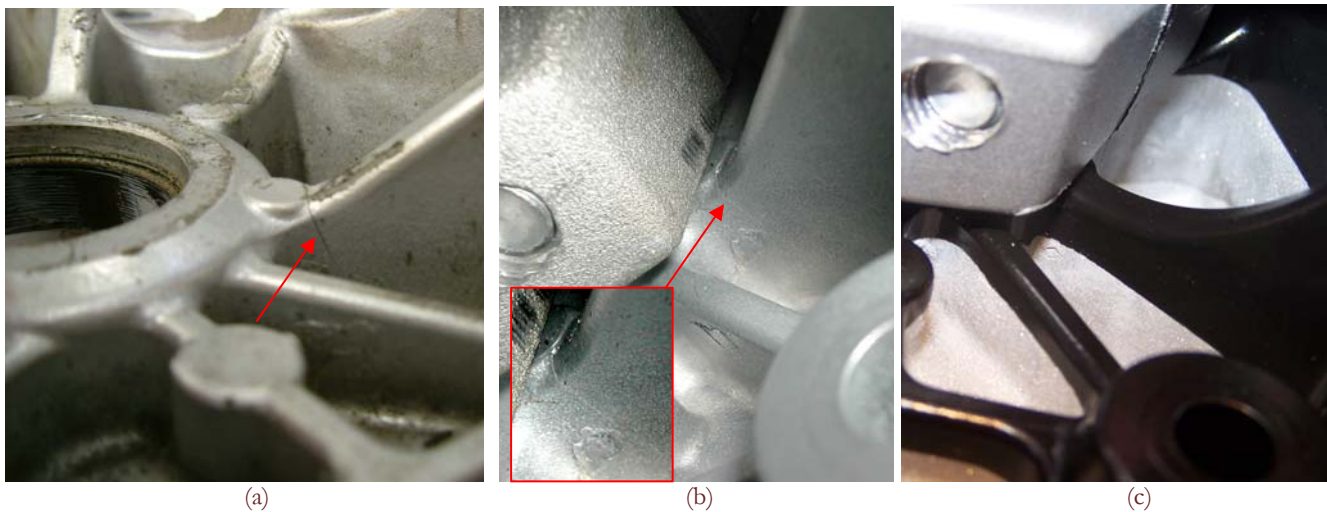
crack detection and redesign. (a) Crack detected after disassembly of prototype undergoing 50000 km drive tests. (b) Crack detected at the same location after 50000 km equivalent variable amplitude fatigue bench tests. (c) Modified component with increased fillet radius to avoid stress concentration.
